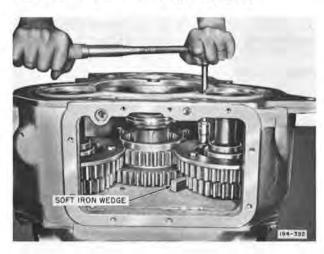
Tightening Upper Compound Countershaft Thrust Washer Capscrews
